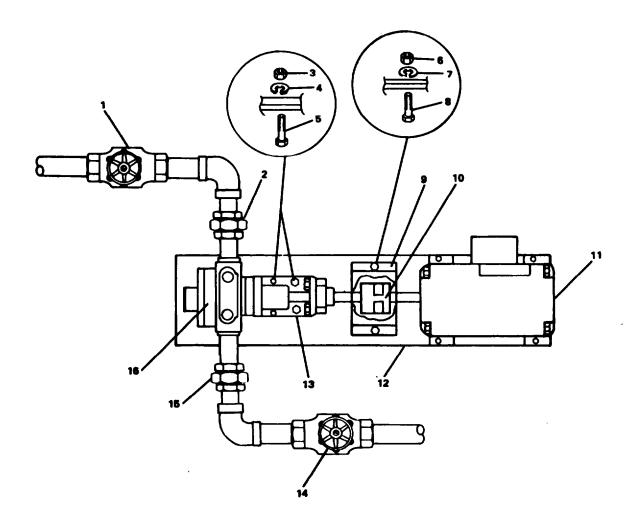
Rotary Pump Unit (Fuel Oil Transfer). Replace.
